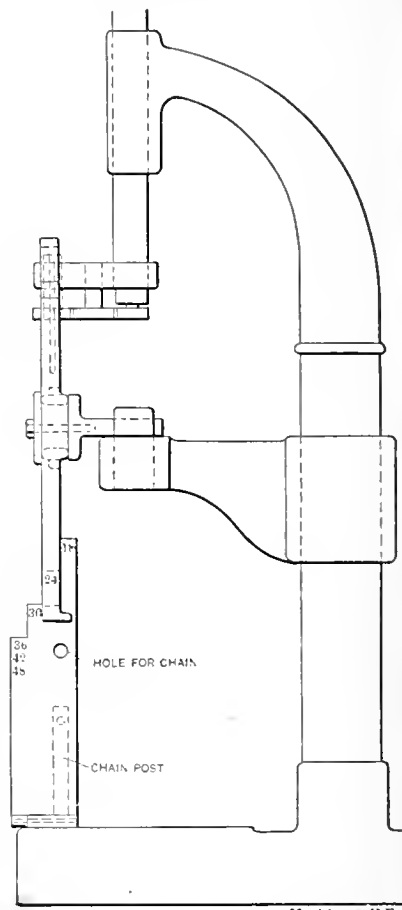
Drill Press equipped with Extension Spindle and other Auxiliary Attachments
